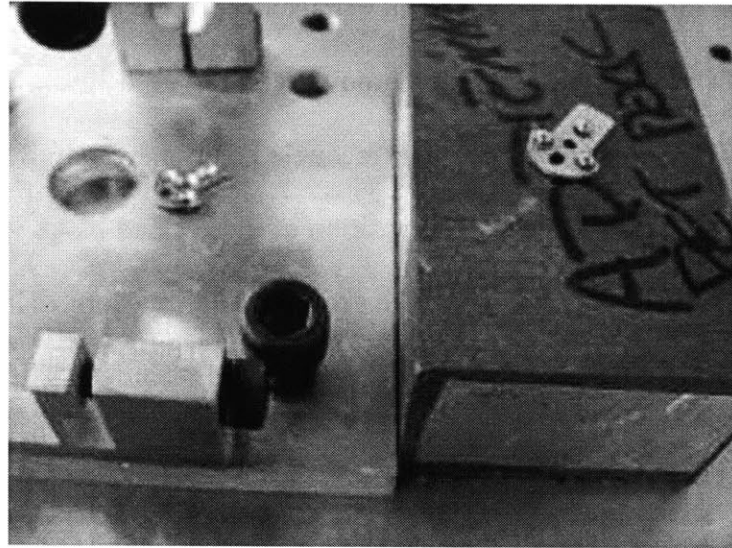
Fixture repeatability and accuracy validation set-up. The groove side of the KC is rigidly mounted to a plate that is bolted to an air table (left) and the ball side is rigidly mounted to a preload weight (right).
